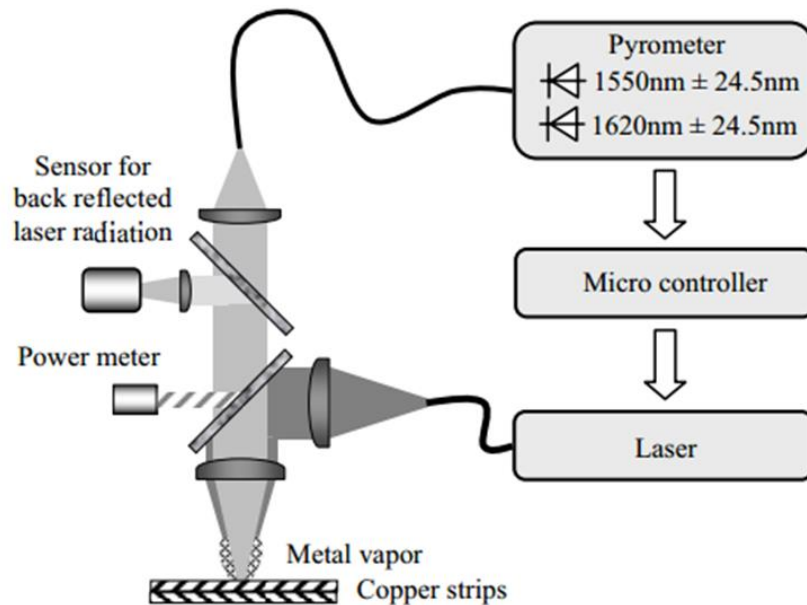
The establishment of closed-loop control by utilizing high-speed pyrometer systems in laser micro-spot welding [104]
